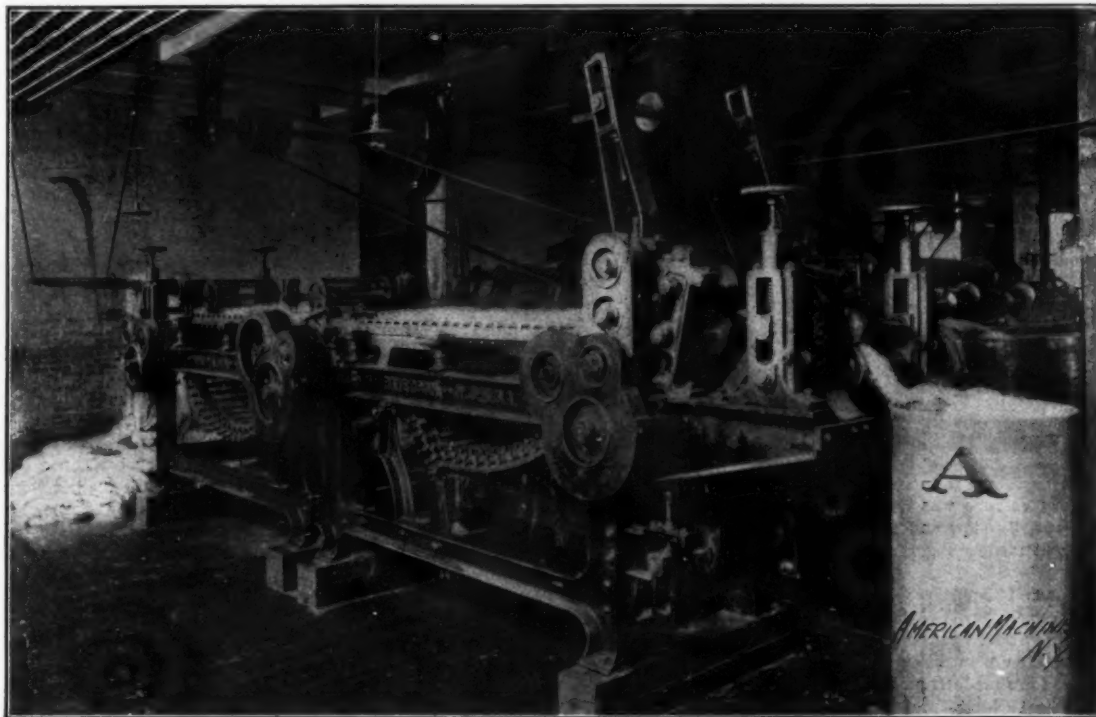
SEPARATING AND FINISHING MACHINE.
